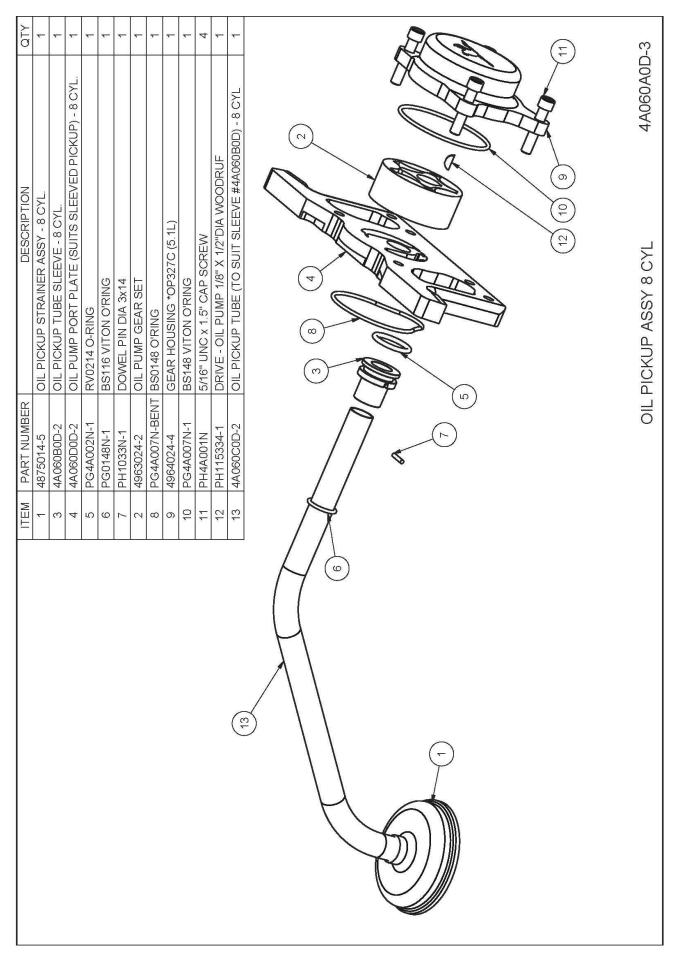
Oil Pickup & Pump Assembly 8 cyl
